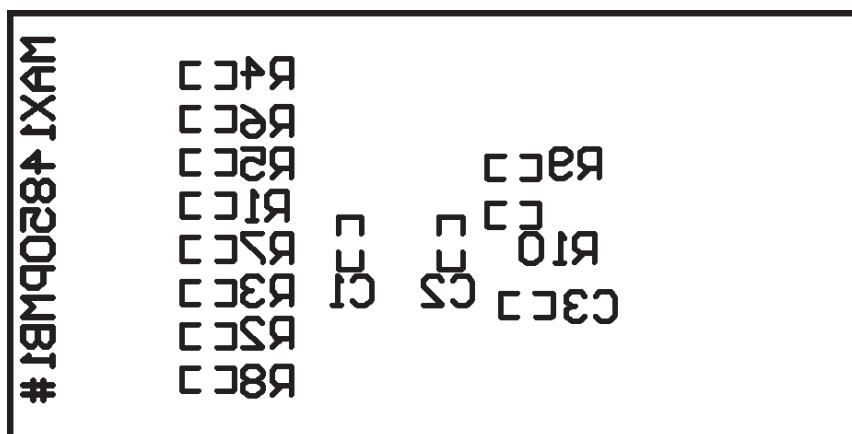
MAX14850PMB1 Peripheral Module Component Placement Guide—Solder Side
